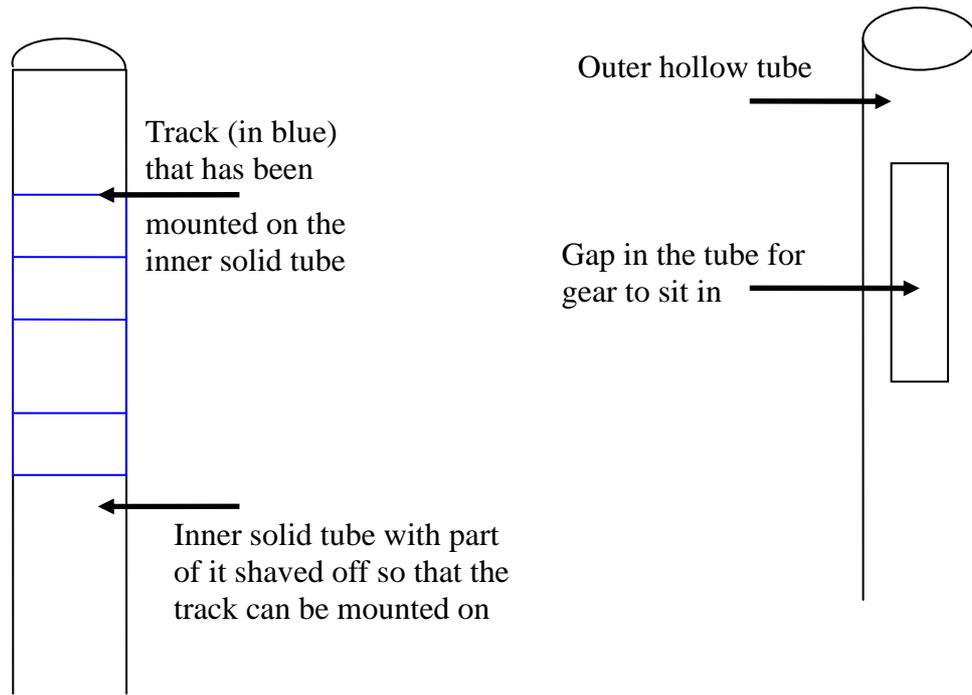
Sketch diagram of inner solid tube and outer hollow tube
